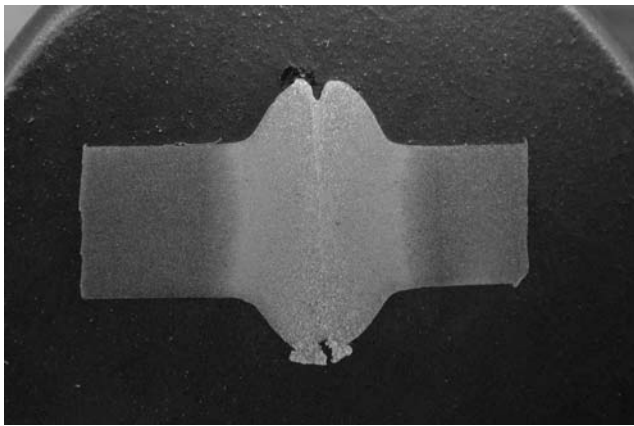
Typical weld profile and bond line in MIAB welding.
